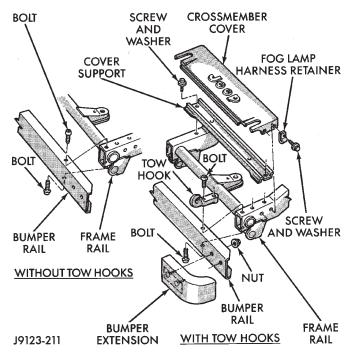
Front Bumper Rail, Crossmember Cover & Tow Hooks
